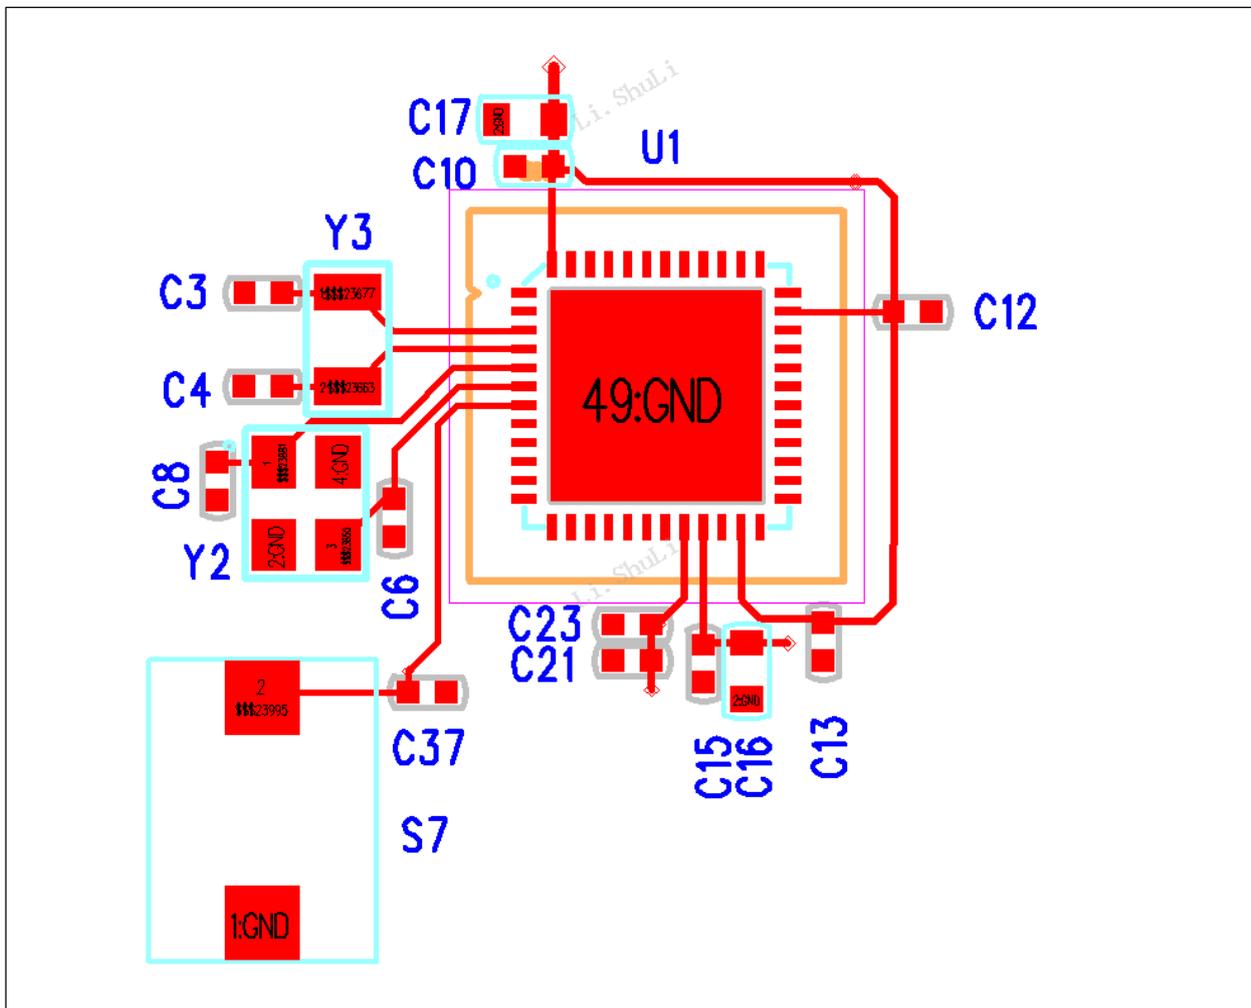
UQFN48 package PCB LAYOUT reference diagram
